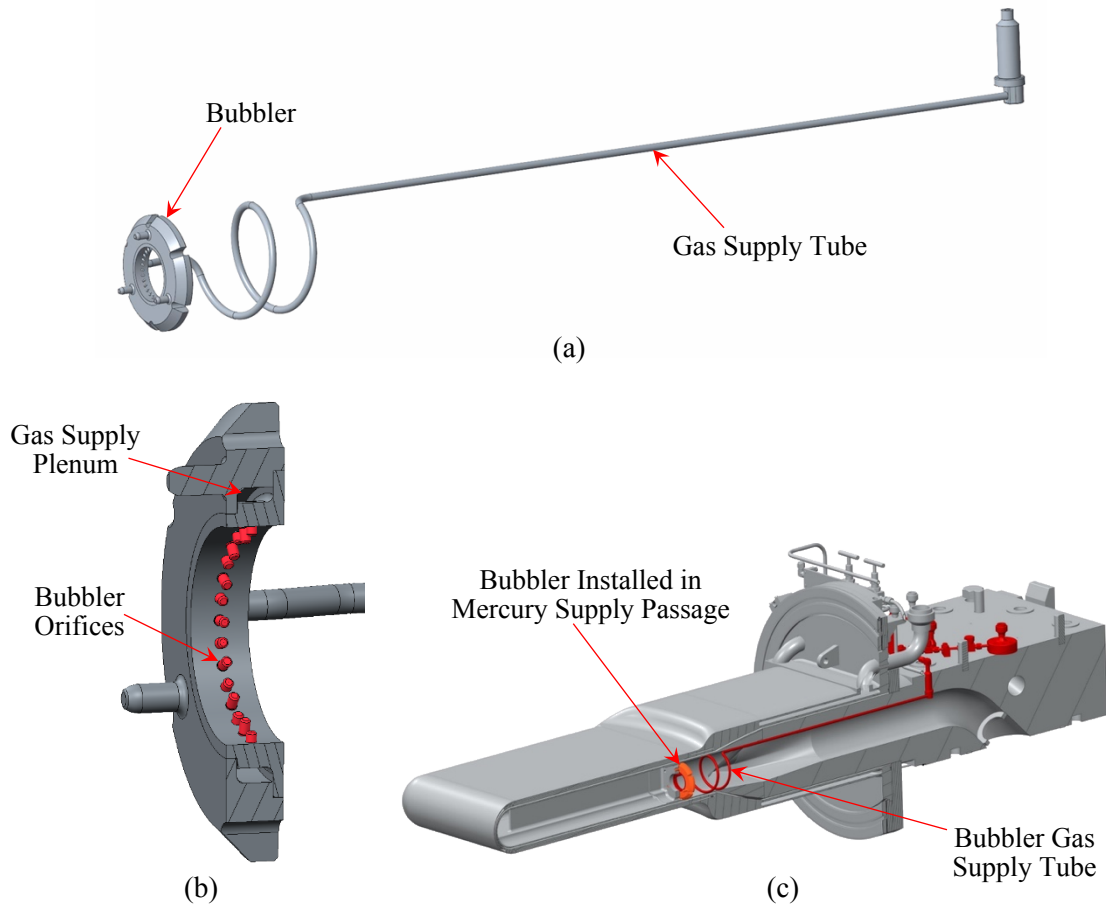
(a) Illustration of SNS orifice bubbler assembly (b) cross-sectional view of an SNS target orifice bubbler and (c) sectioned view of a bubbler assembly installed in a target supply passage.
